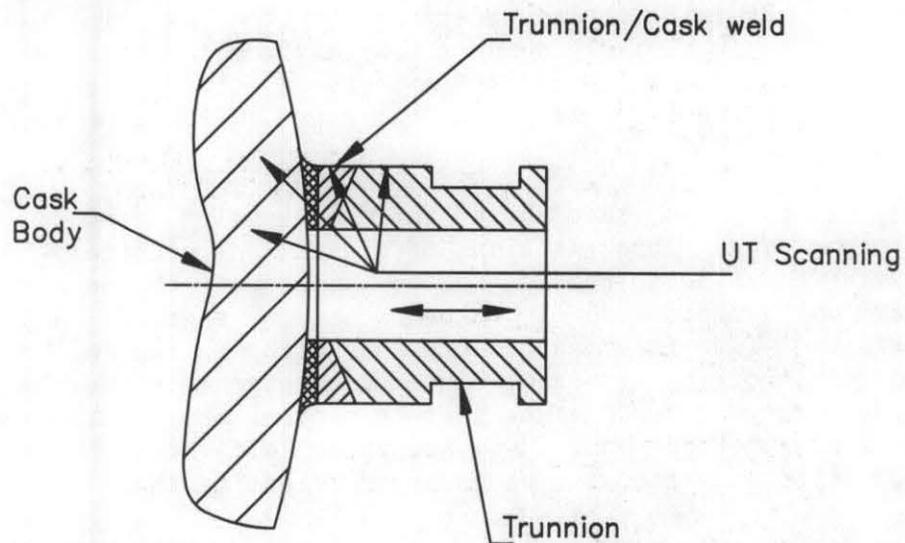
EXAMPLE OF UT TESTING OF TRUNNION/ CASK WELD
